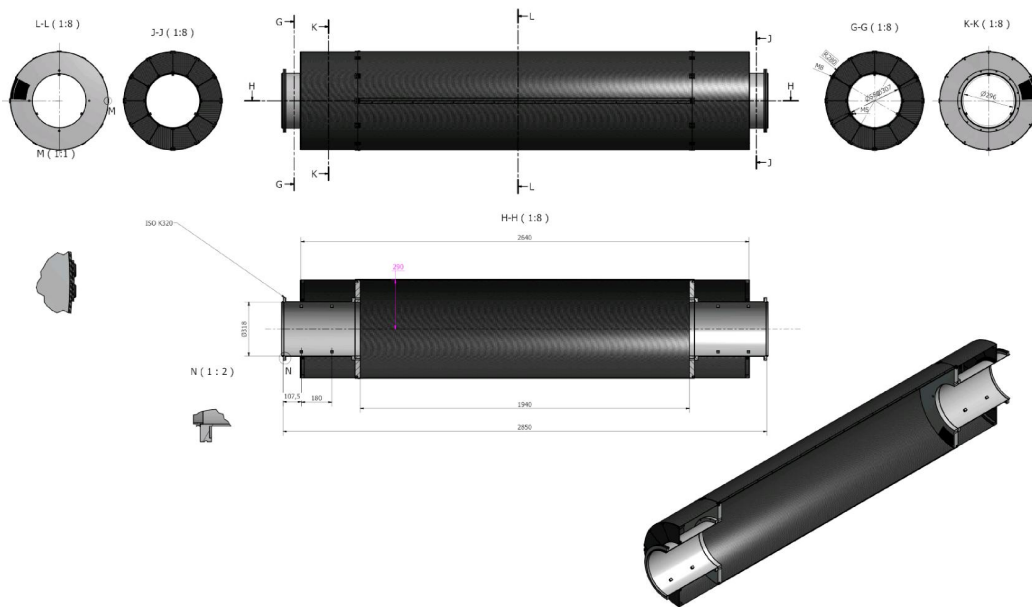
The mechanical sketch of cylindrical drift chamber [3].
